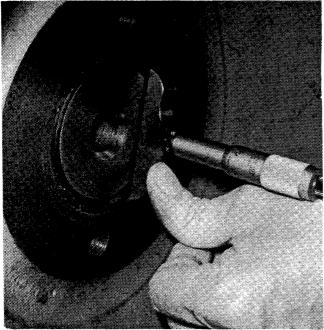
Measuring Gap Between Drive Spider and End of Input Shaft.
